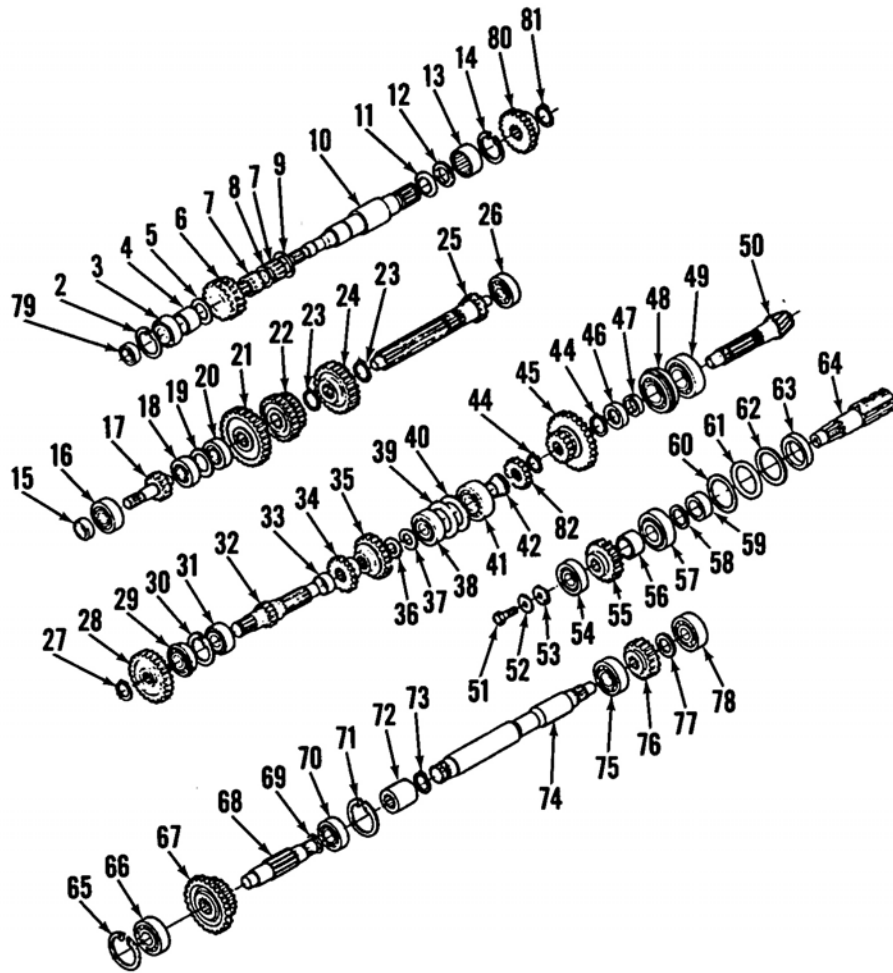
Exploded view of transmission gears, shafts and other components showing relative installed position used on Model B5100D. For identification of parts, refer to legend in Fig. 75 except for the following front-wheel drive components.
